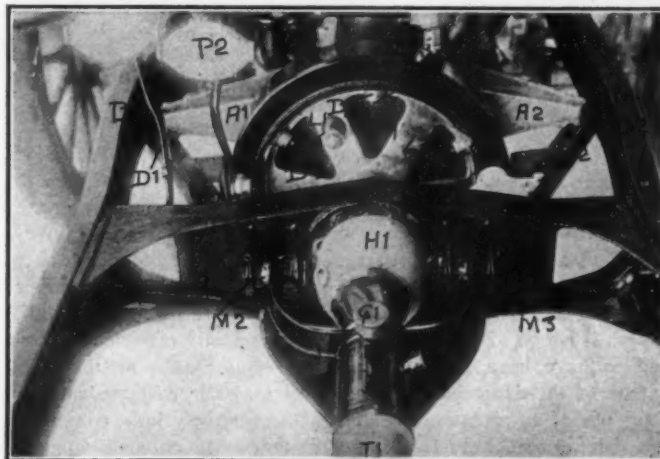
Looking at the clutching mechanism and universal joint, also the torsion tube yoke and other features of design
